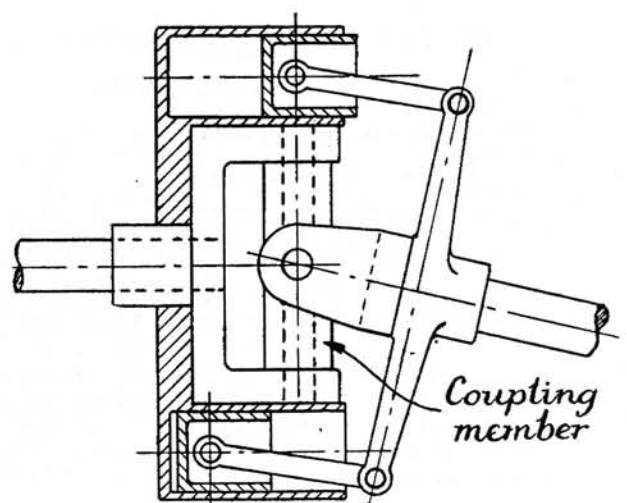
By attaching cylinder and piston elements to the respective members of a Hooke's coupling, it can be adapted to work as an engine or pump. The piston stroke may be varied by altering the angularity between the two shafts.
